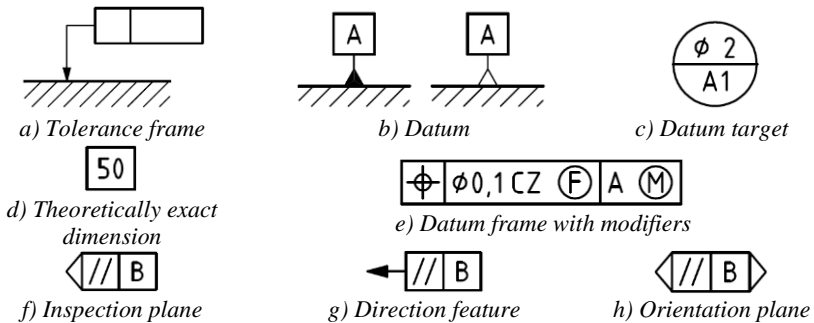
Some drawing symbols related to geometric tolerances
